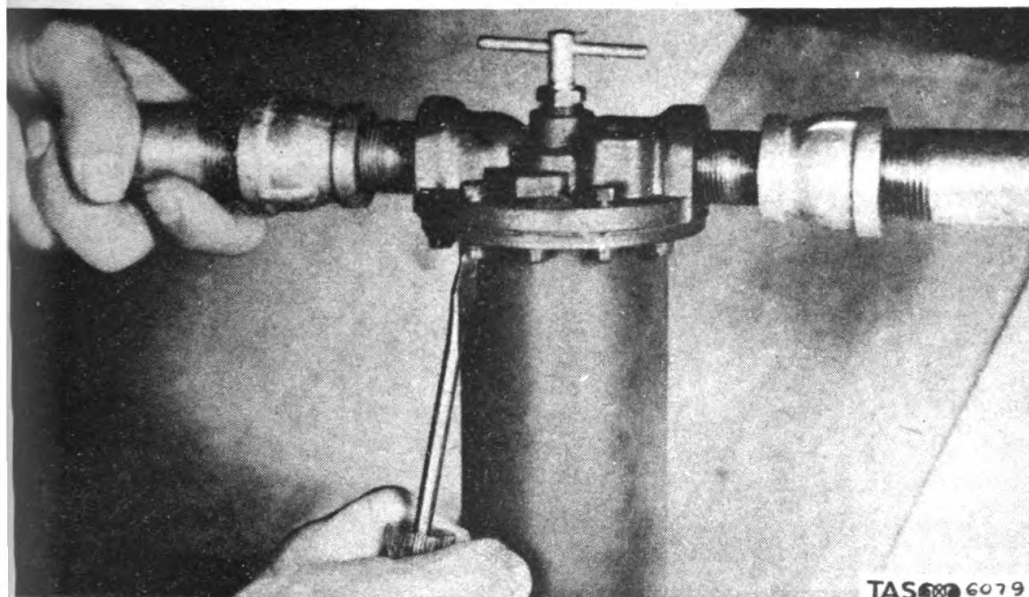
Loosening Screws Under Rim and Top of Sump Assembly.
